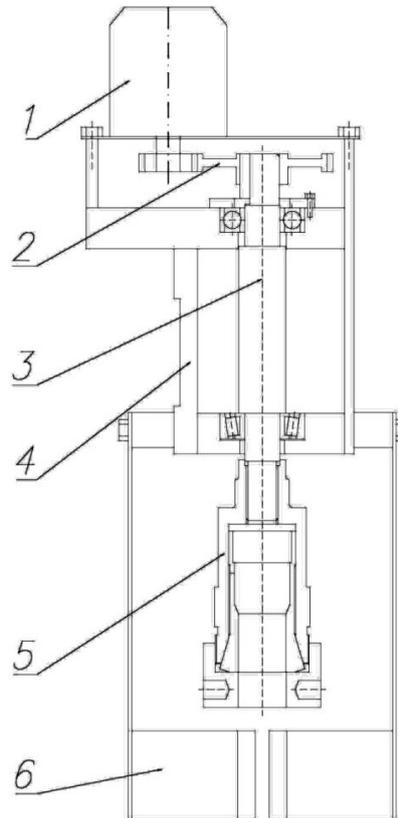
Electrode rotation mechanism: 1 – engine; 2 – transmission; 3 – shaft; 4 – body; 5 – collet; 6 – contact brushes.
